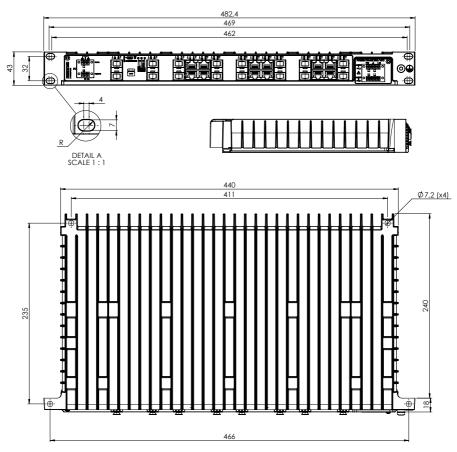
Dimensional drawing, illustrated by a RedFox-5728-F16G-T12G-HVHV
